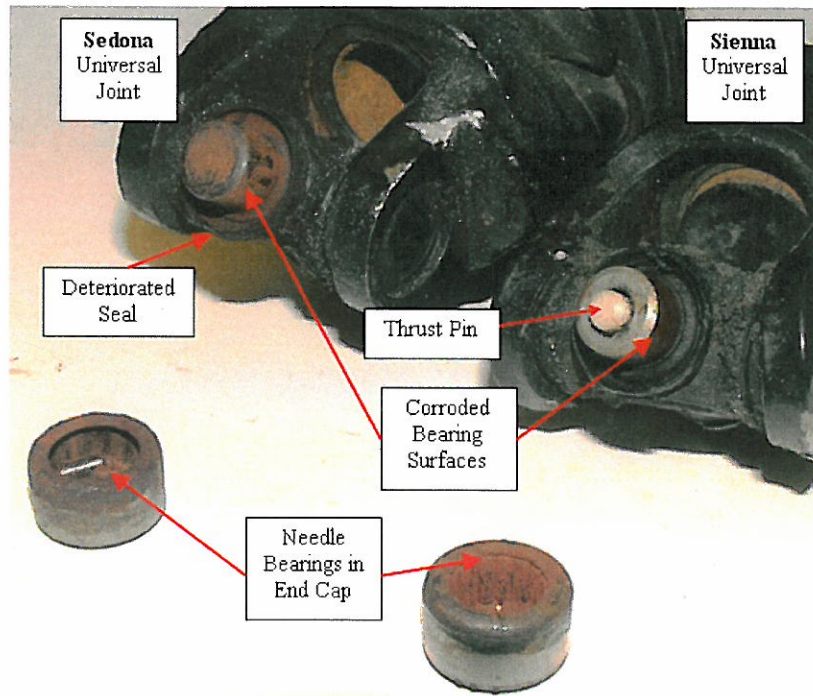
Intermediate Shafts Disassembled, Sedona Left - Sienna Right
